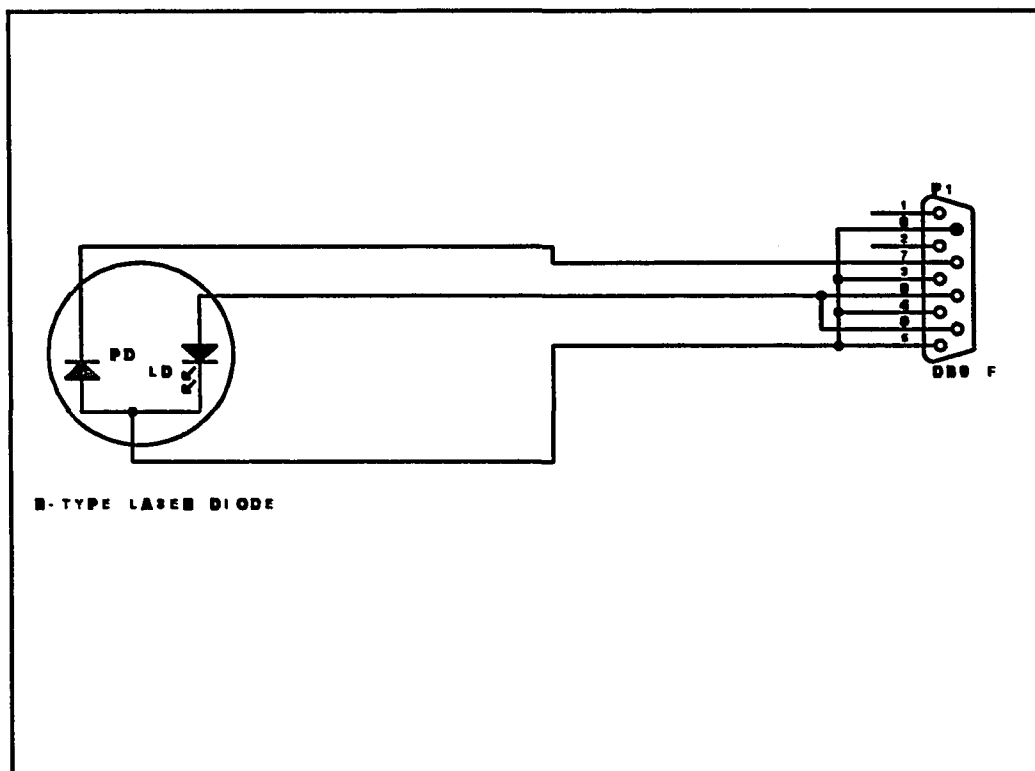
Cable assembly drawing for connecting the type R laser diode to its driver circuit.
